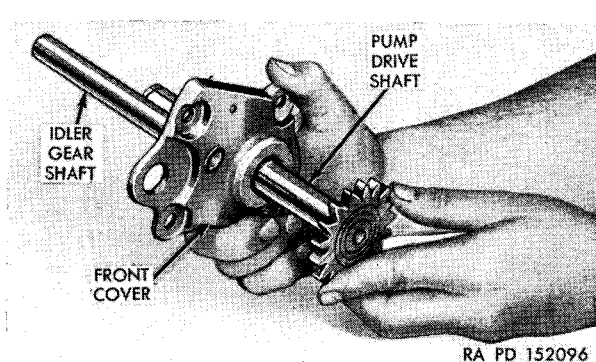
Removing or installing input-scavenge and converter-circulating-pump drive shaft.
